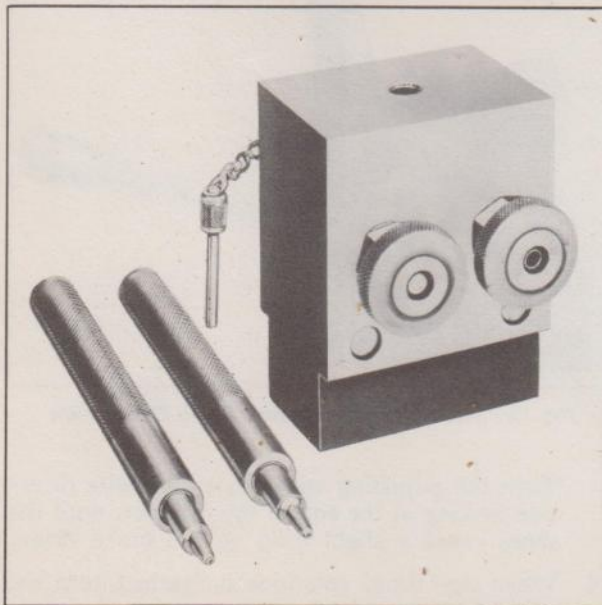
Hydraulic Brake Tubing Flaring Tool
